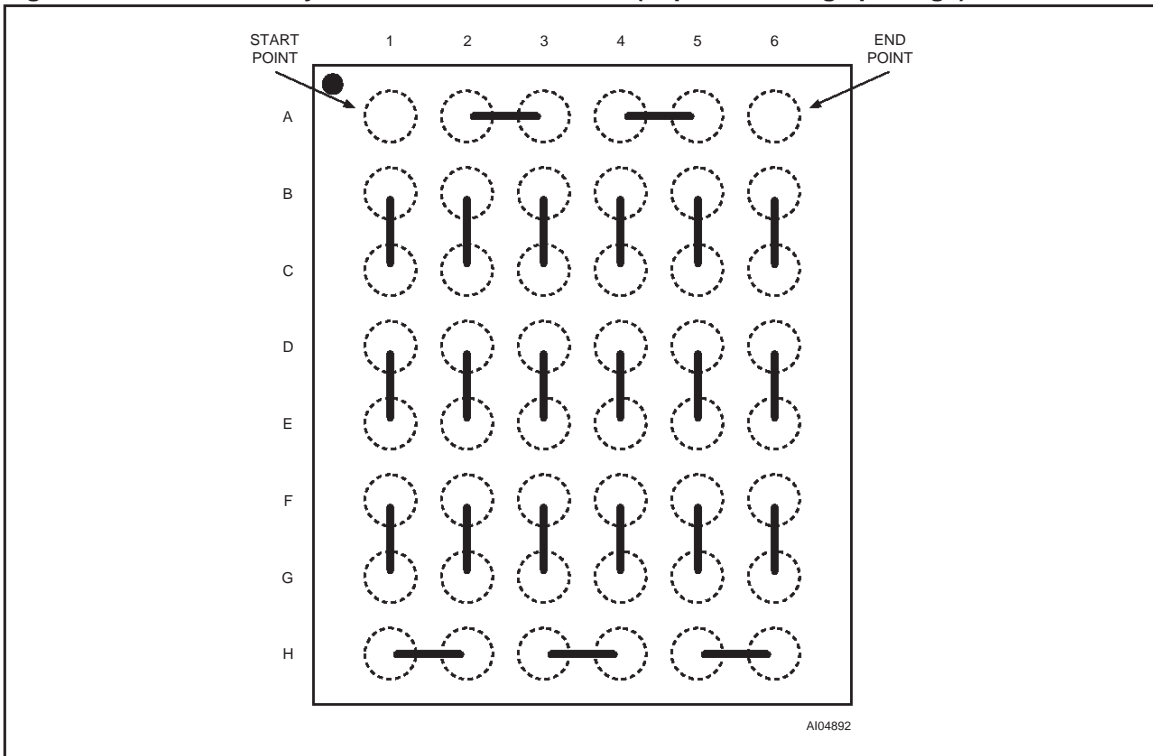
TFBGA48 Daisy Chain - PCB Connections (Top view through package)
